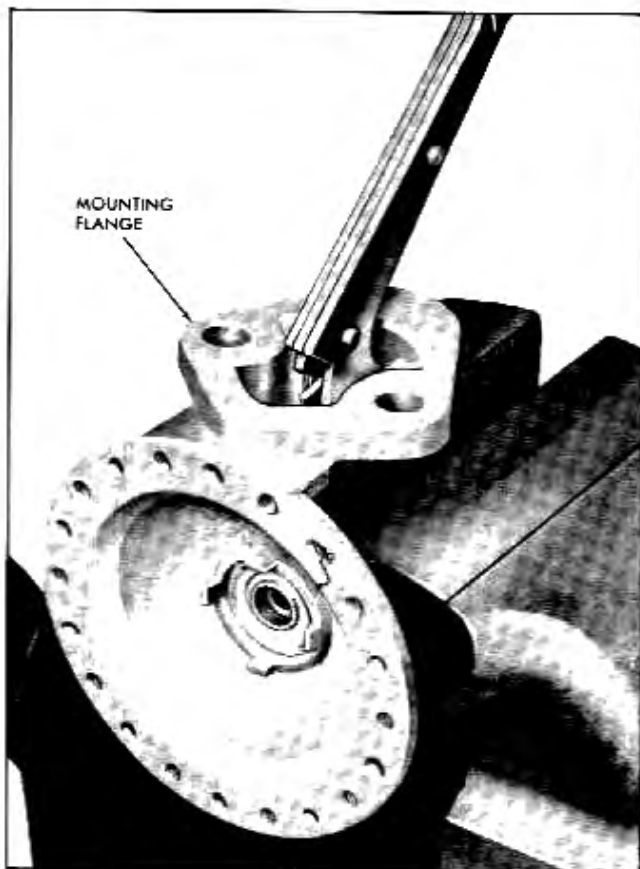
B-105 Correctly Positioning Pump Body in Vise
